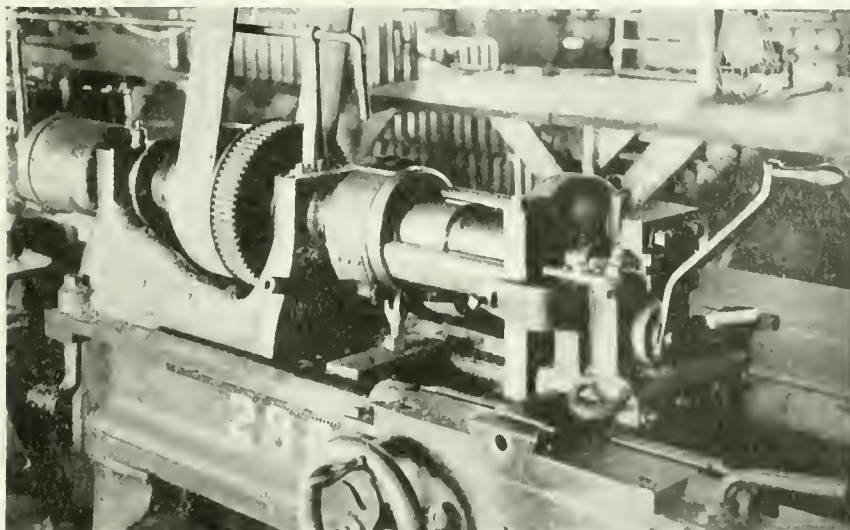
SPECIAL FIXTURE FOR FINISHING SHRAPNEL SOCKETS.
